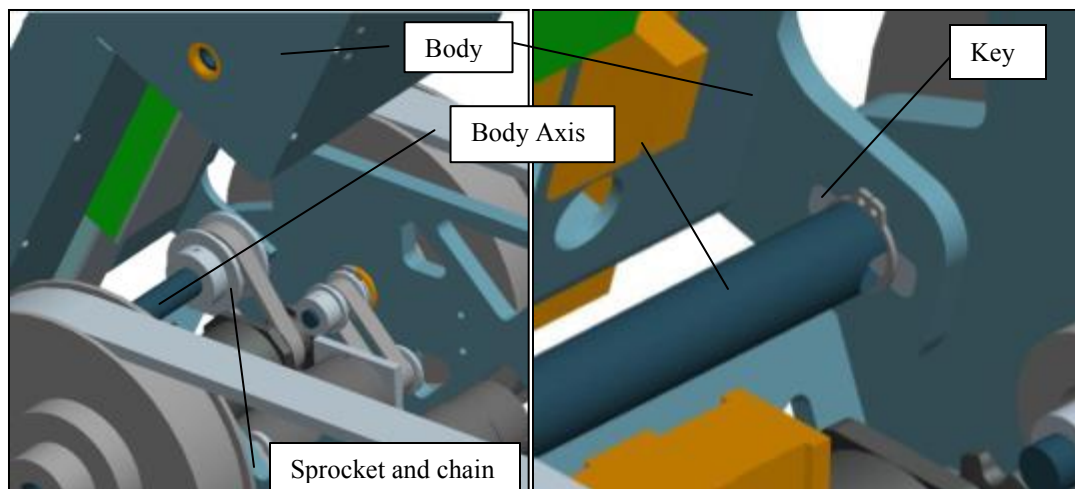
Chain and sprocket used to transmit torque to body axis (left) Custom keyway used to transfer torque from body axis to the body side (right)
